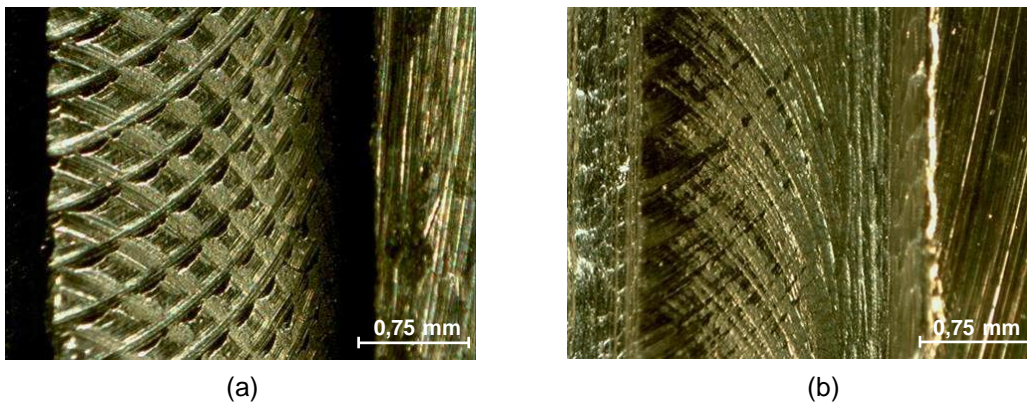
Surface texture of the material machined with uncoated tools: (a) dry milling, $vc = 20$ m/min, with new tool; (b) machining with MQL, $vc = 40$ m/min, with end of tool life.
